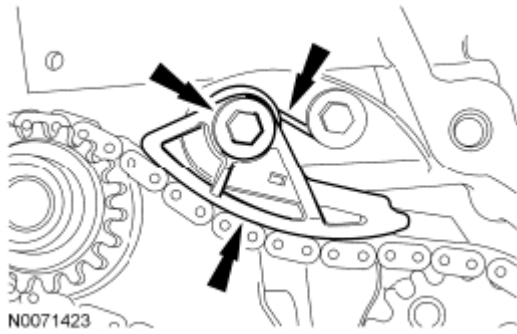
Locating Oil Pump Chain Tensioner With Bolt
